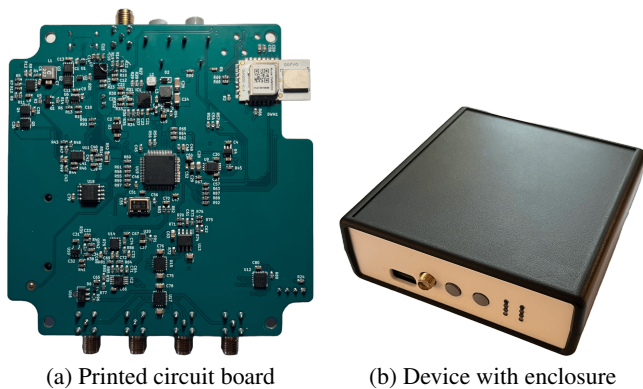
Photographs of the developed hardware: (a) printed circuit board (PCB) and (b) fully assembled device.
